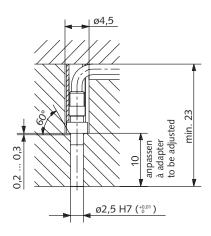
Mounting Type 6195B... with spacer sleeve Type 6464A3
